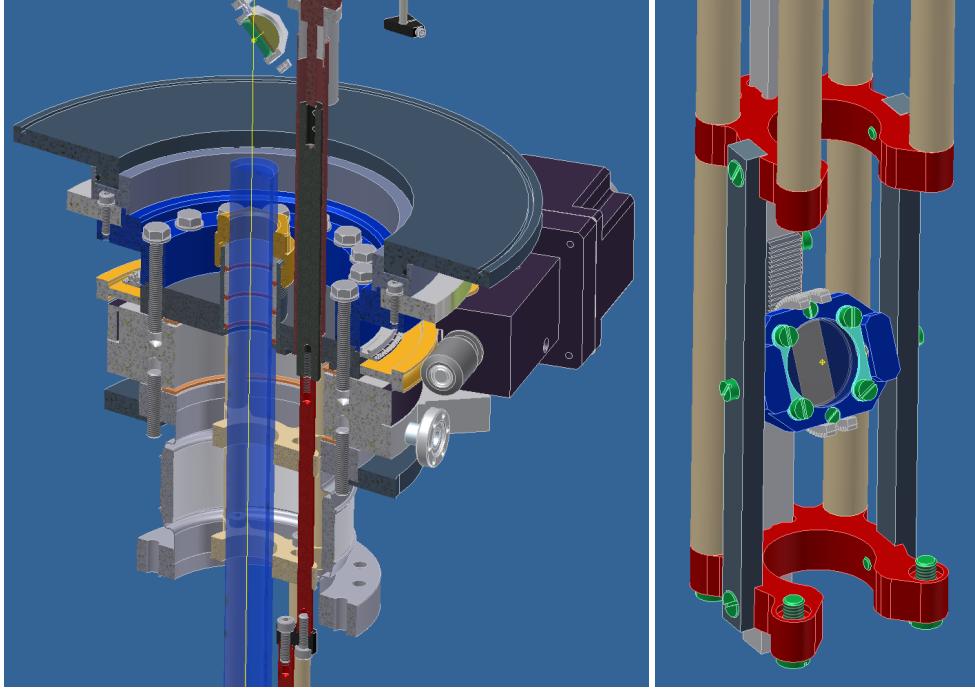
Left: CAD cutaway drawing of the feedthrough construction is shown. The yellow line indicates the laser path. Right, CAD drawing of the cold mirror including the support structure.
